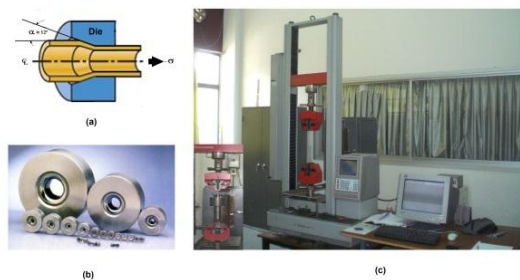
Tube drawing: (a) experimental model (b) tungsten dies (c) universal testing machine
